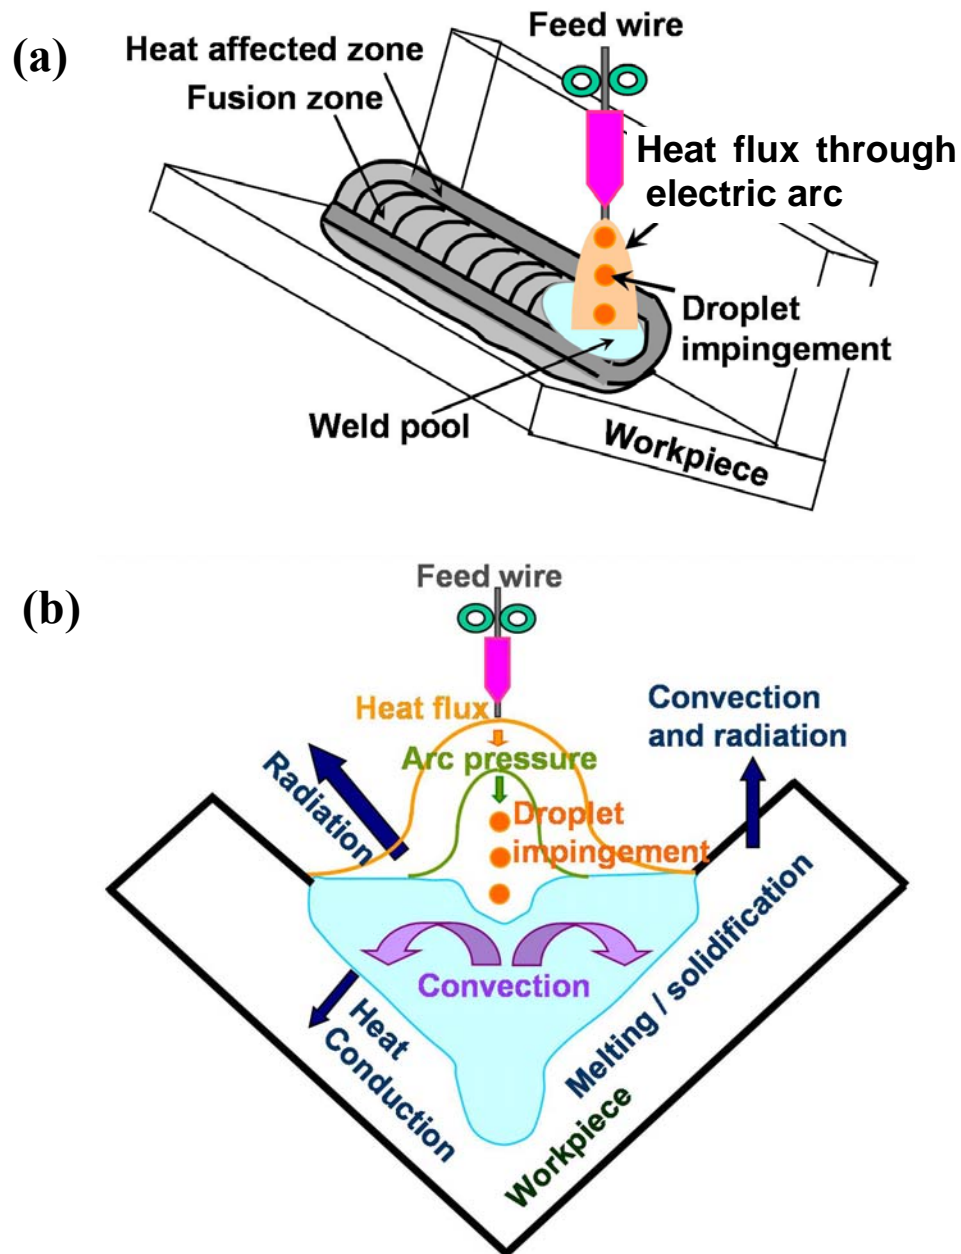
Schematic plot depicting the GMA fillet welding process: (a) interaction between the heat source and the base material; and (b) the transverse section showing the physical processes occurring in the weld pool.
